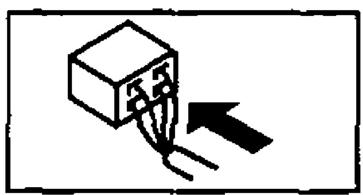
Identifying Flasher Control Module Connector Courtesy of MAZDA MOTORS CORP.
